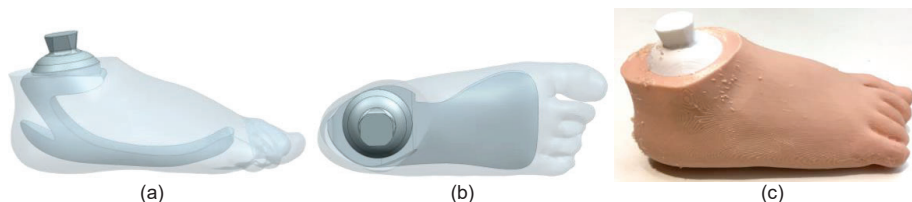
Prosthetic Foot: a) Sagittal view of the two components; b) Top view of the two components; c) 3D printed physical prototype (multi-material printing of the two components).
